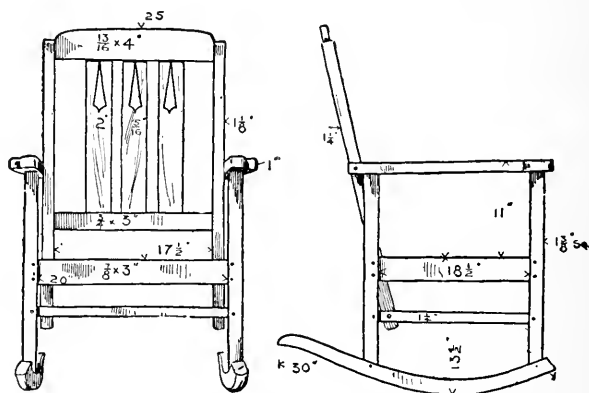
Porch Rocker, Showing Front and Side Views.
